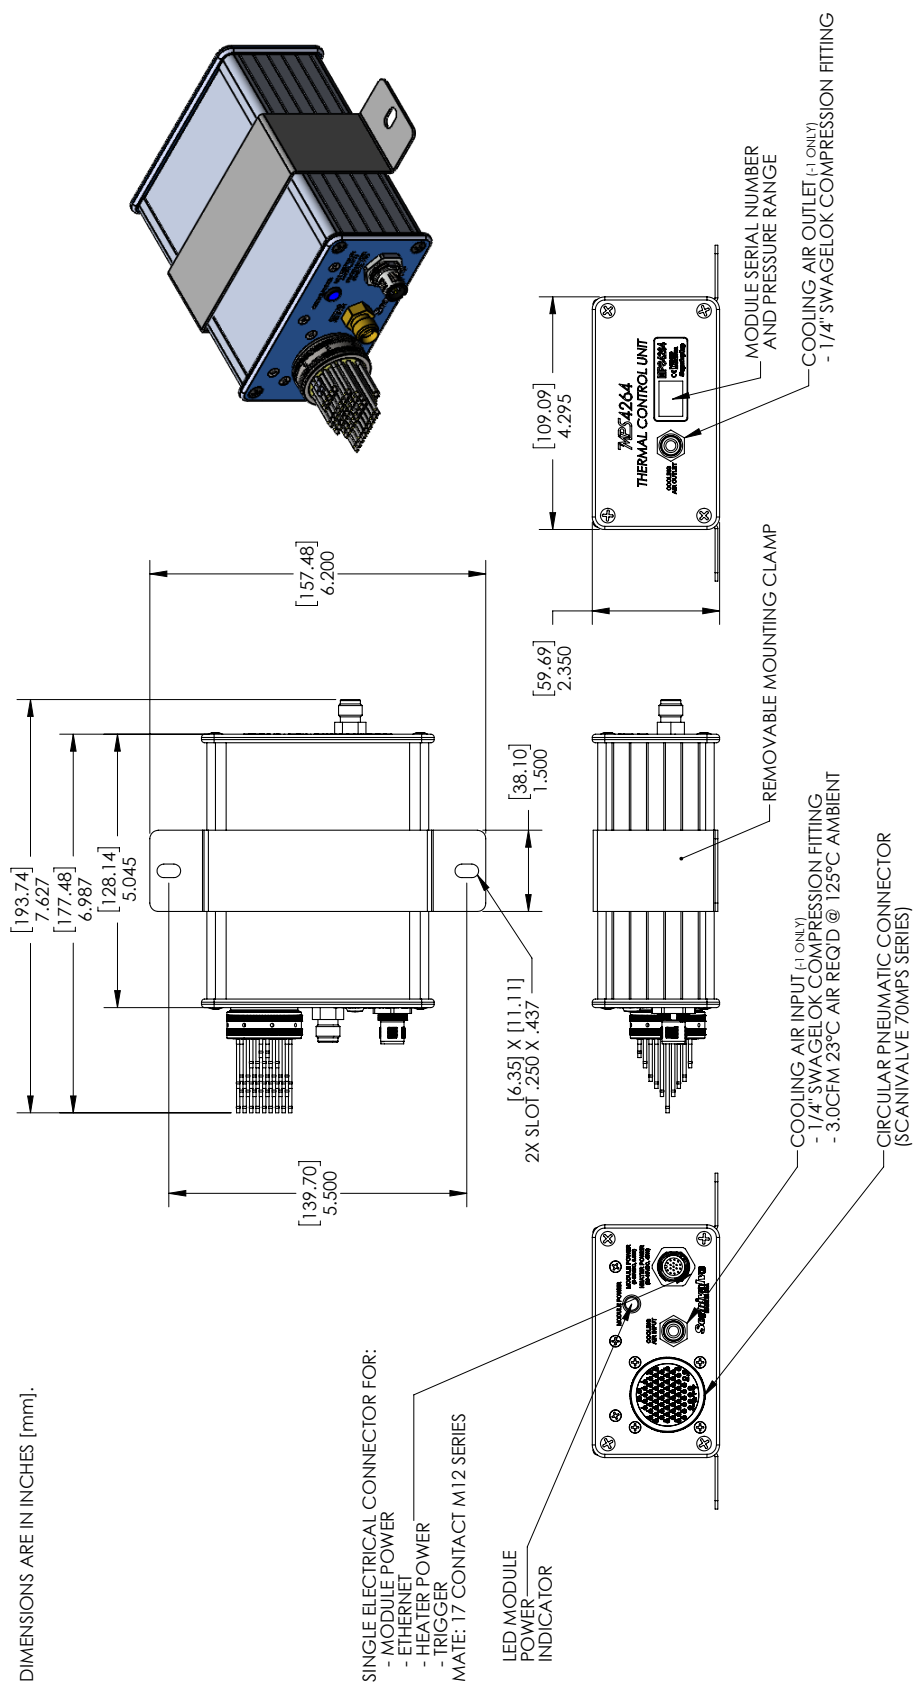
MPS4264TCU CPX AND NPX DIMENSIONAL DRAWING
